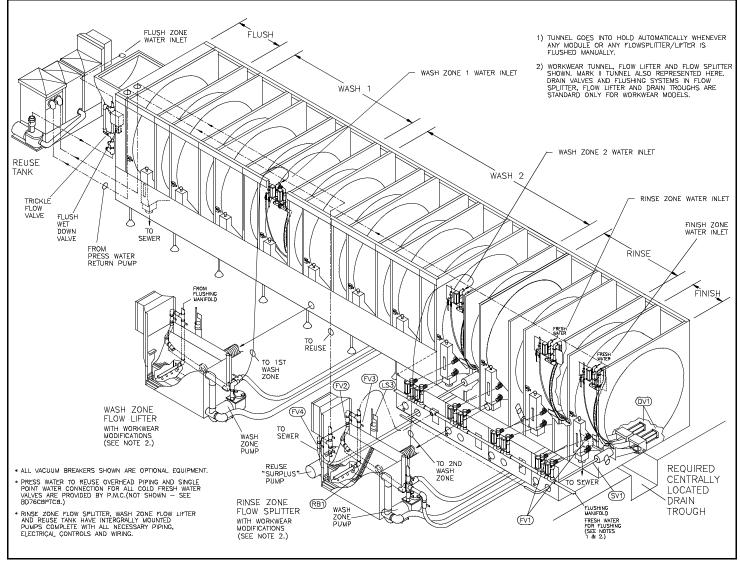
(MSSMD405BE) Typical Workwear CBW Tunnel Washer
